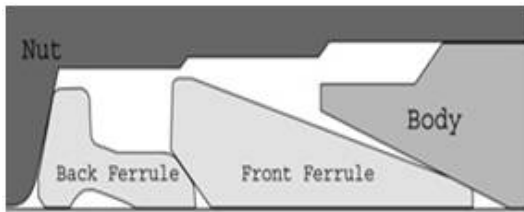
Tube Fitting with Advanced Geometry Back Ferrules Prior to Make-up
